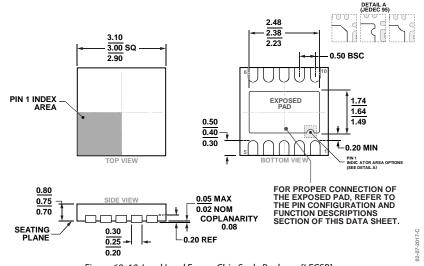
10-Lead Lead Frame Chip Scale Package [LFCSP] 3 mm × 3 mm Body and 0.75 mm Package Height (CP-10-9) Dimensions shown in millimeters
